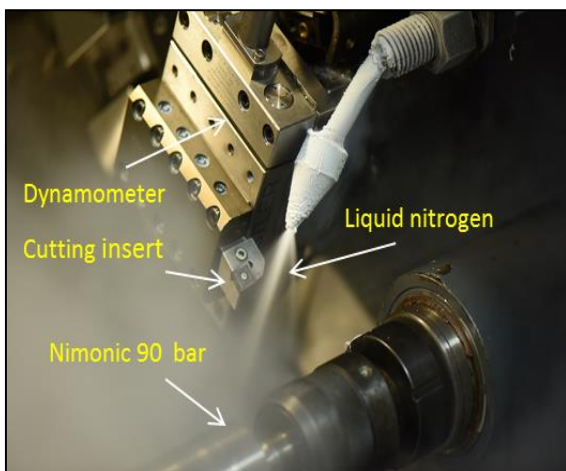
Leadwell T-6 turning center for carrying out dry and cryogenic machining.
